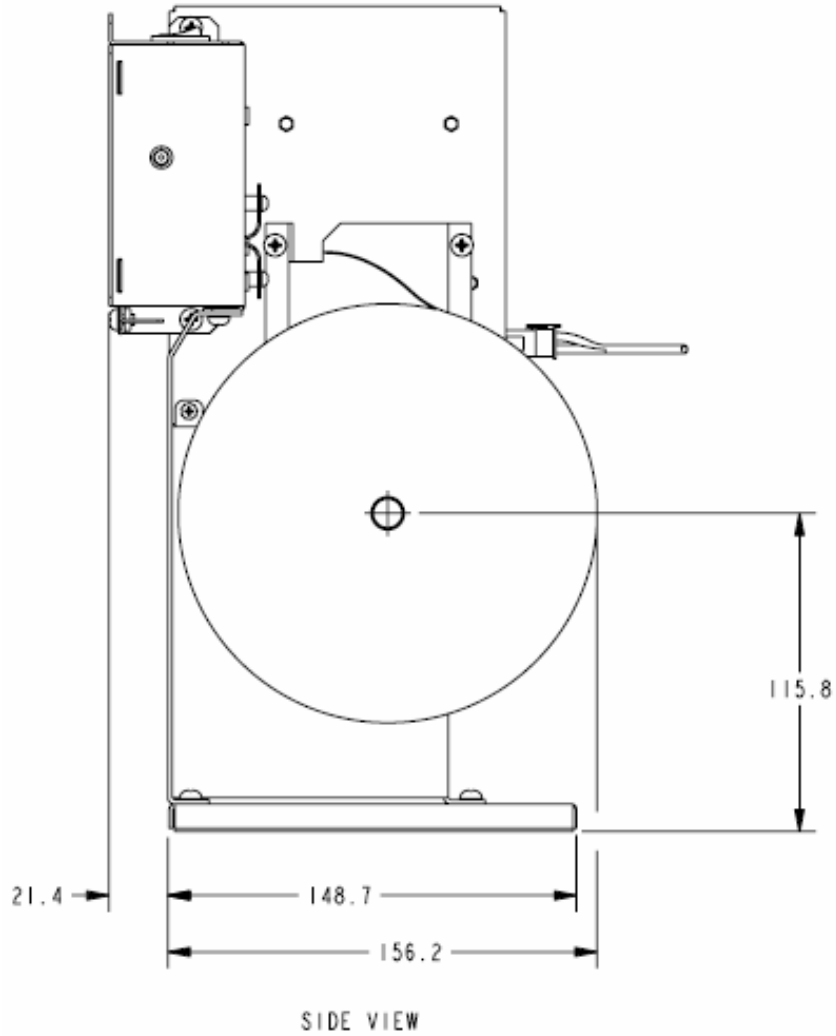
Mechanical Dimensions - High Speed Kiosk Vertical Side View
